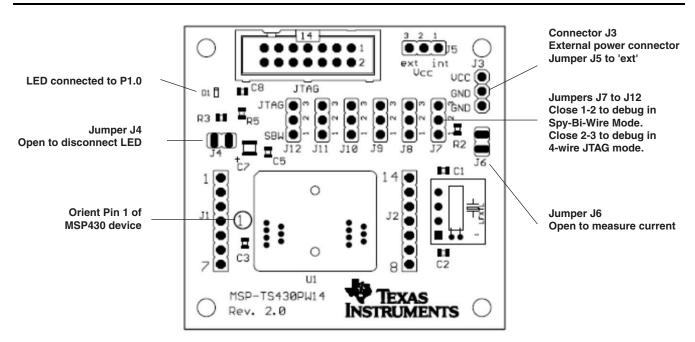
MSP-TS430PW14 Target Socket Module, PCB
